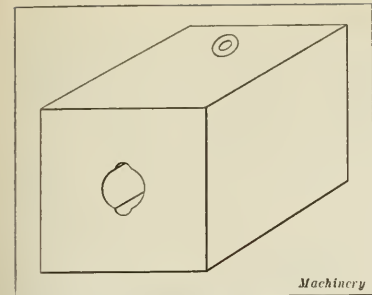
Simple Jig for drilling Cotter-pin Hole
